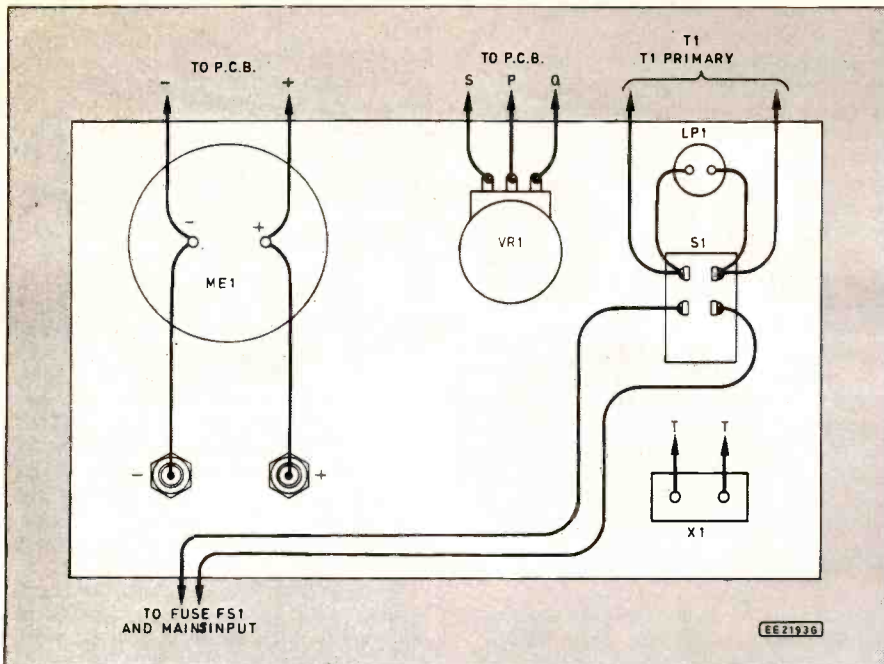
Interwiring to front panel mounted components. Letters relate to points on the p.c.b.
